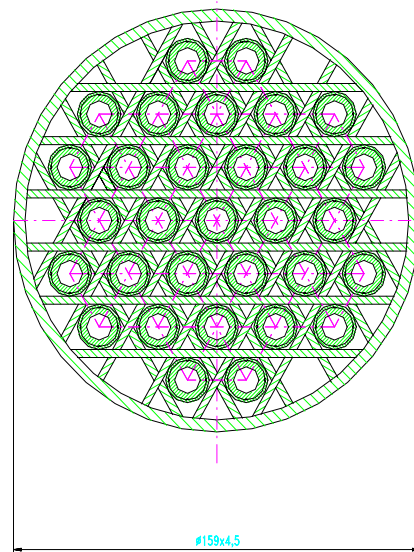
Arrangement of the Tube Bundle Fixing Grids in the SG Module
